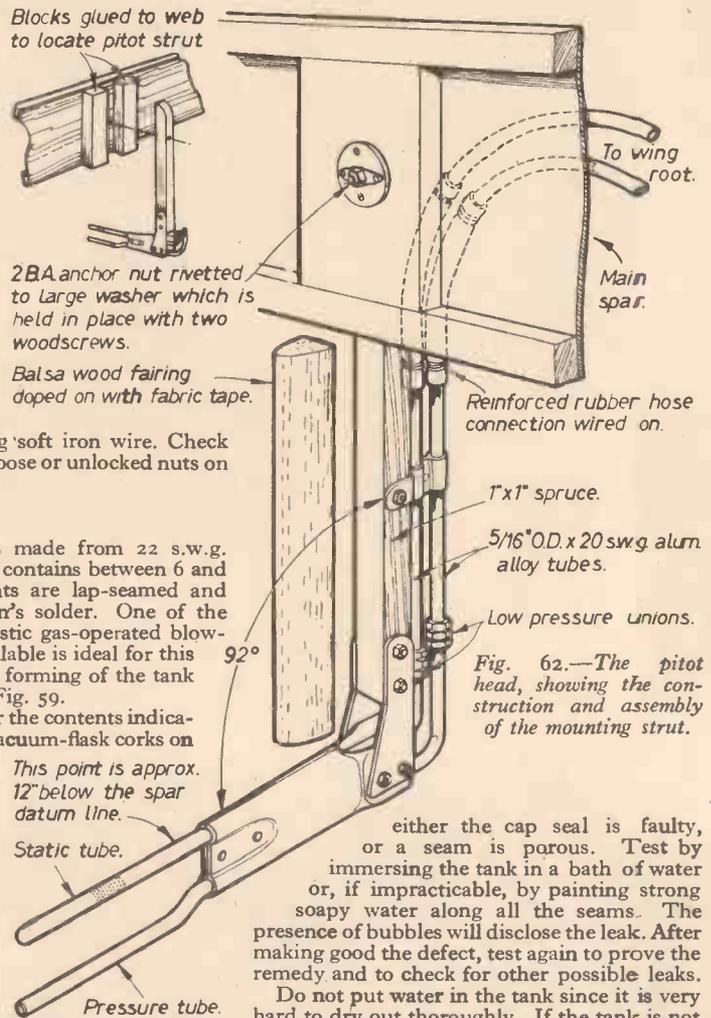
The pitot head, showing the construction and assembly of the mounting strut.
